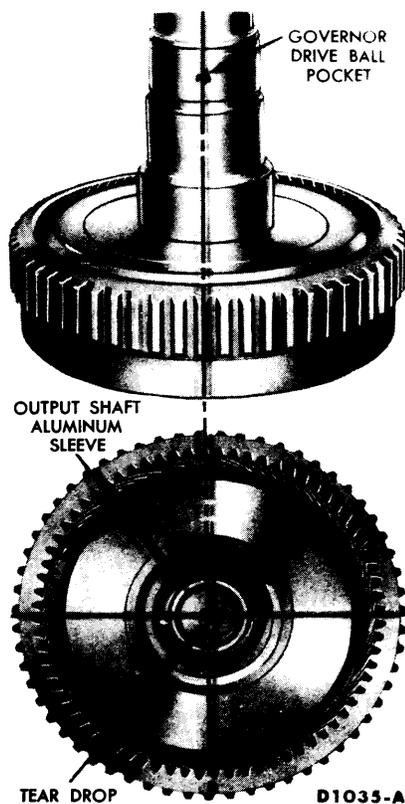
Correct Position of Output Shaft Aluminum Sleeve
